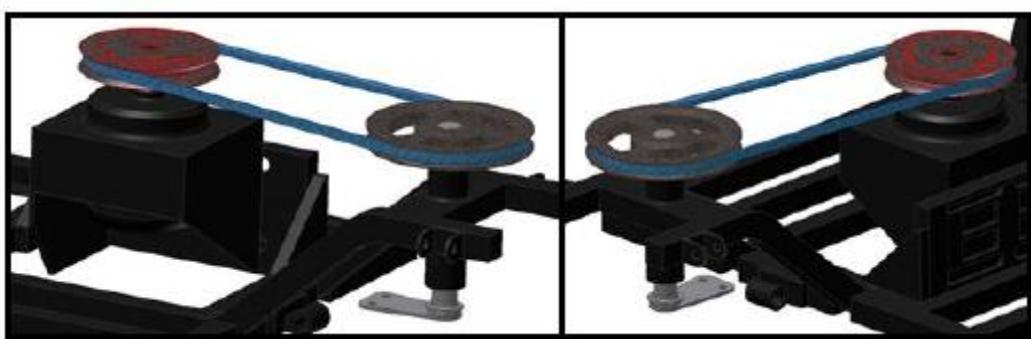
D CAD drawing of steering mechanism using electrical clutch and pulley.
